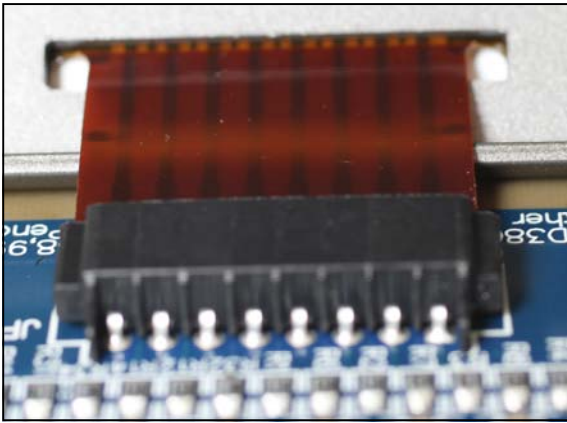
Remove the ribbon connecting the circuit board to the membrane.
